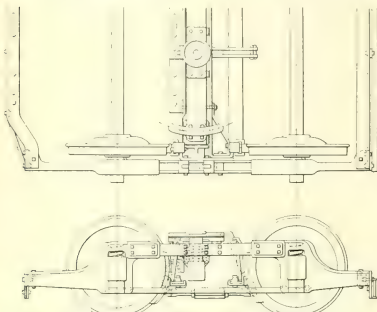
TRACTION MOTOR TRUCK BY THE BEMIS CAR BOX COMPANY
